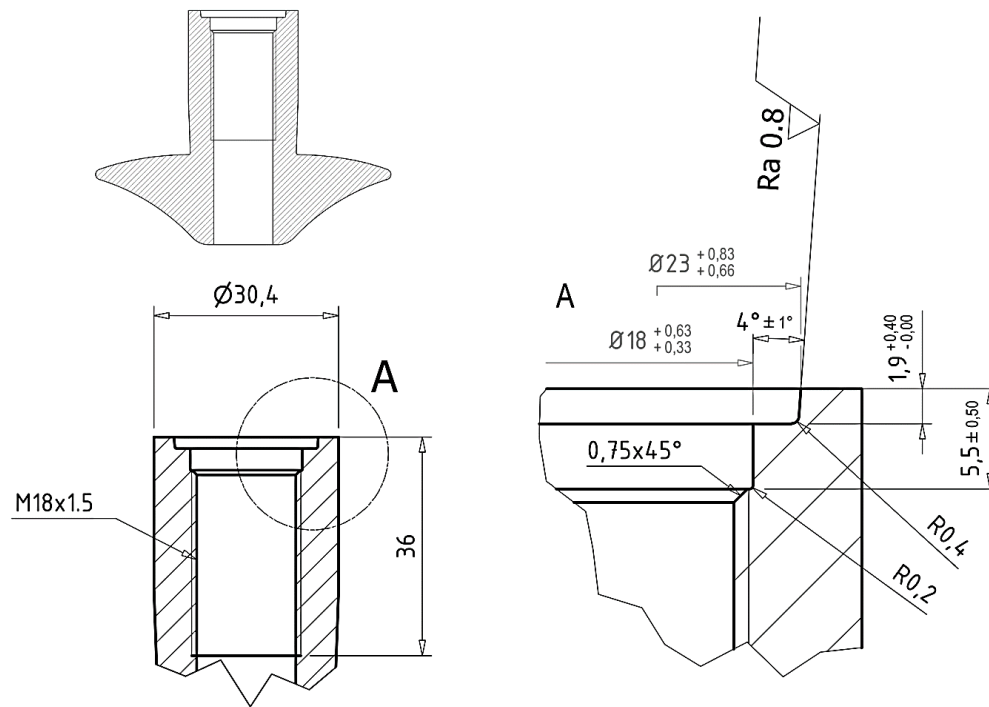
Polar boss fitting threaded interface dimensions according to ISO 15245-1:2021.
